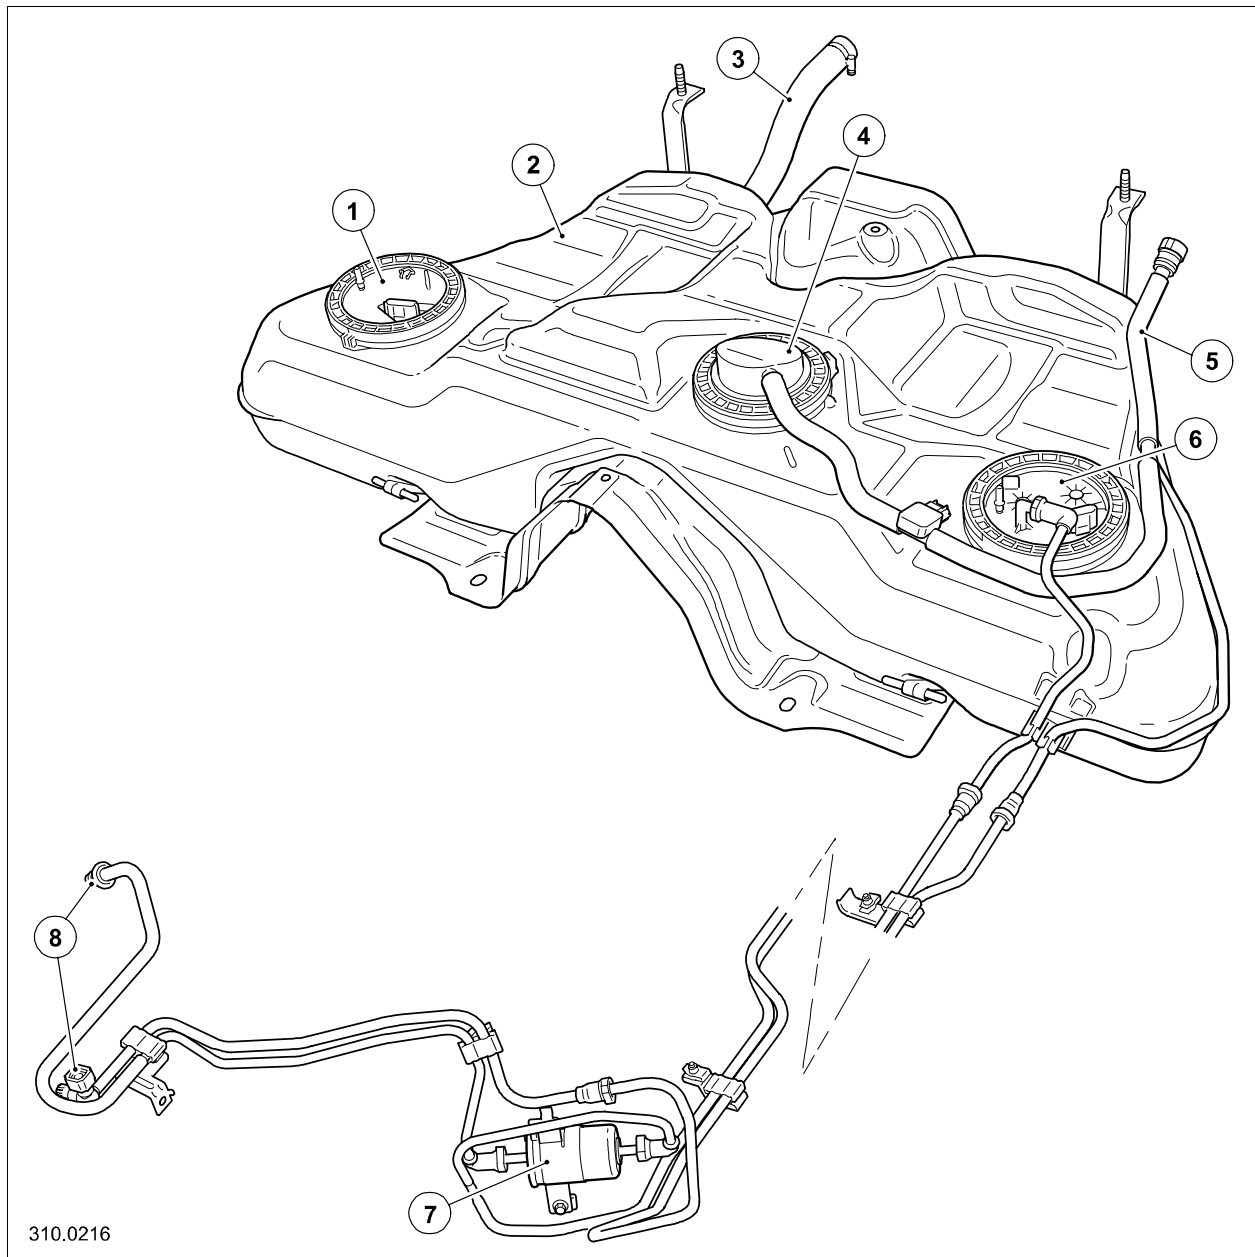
S-TYPE (X204) FUEL TANK (S/C ENGINES)
